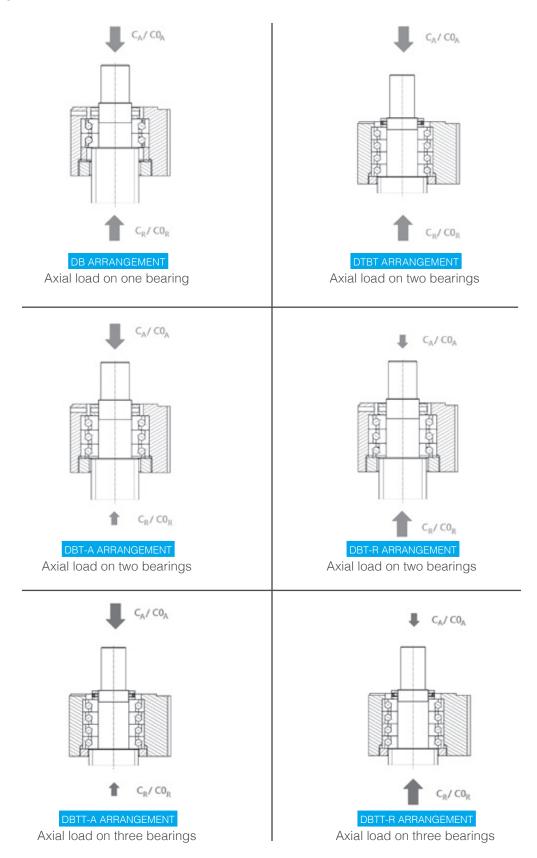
Bearing arrangement in fixed bearing units BSTK
